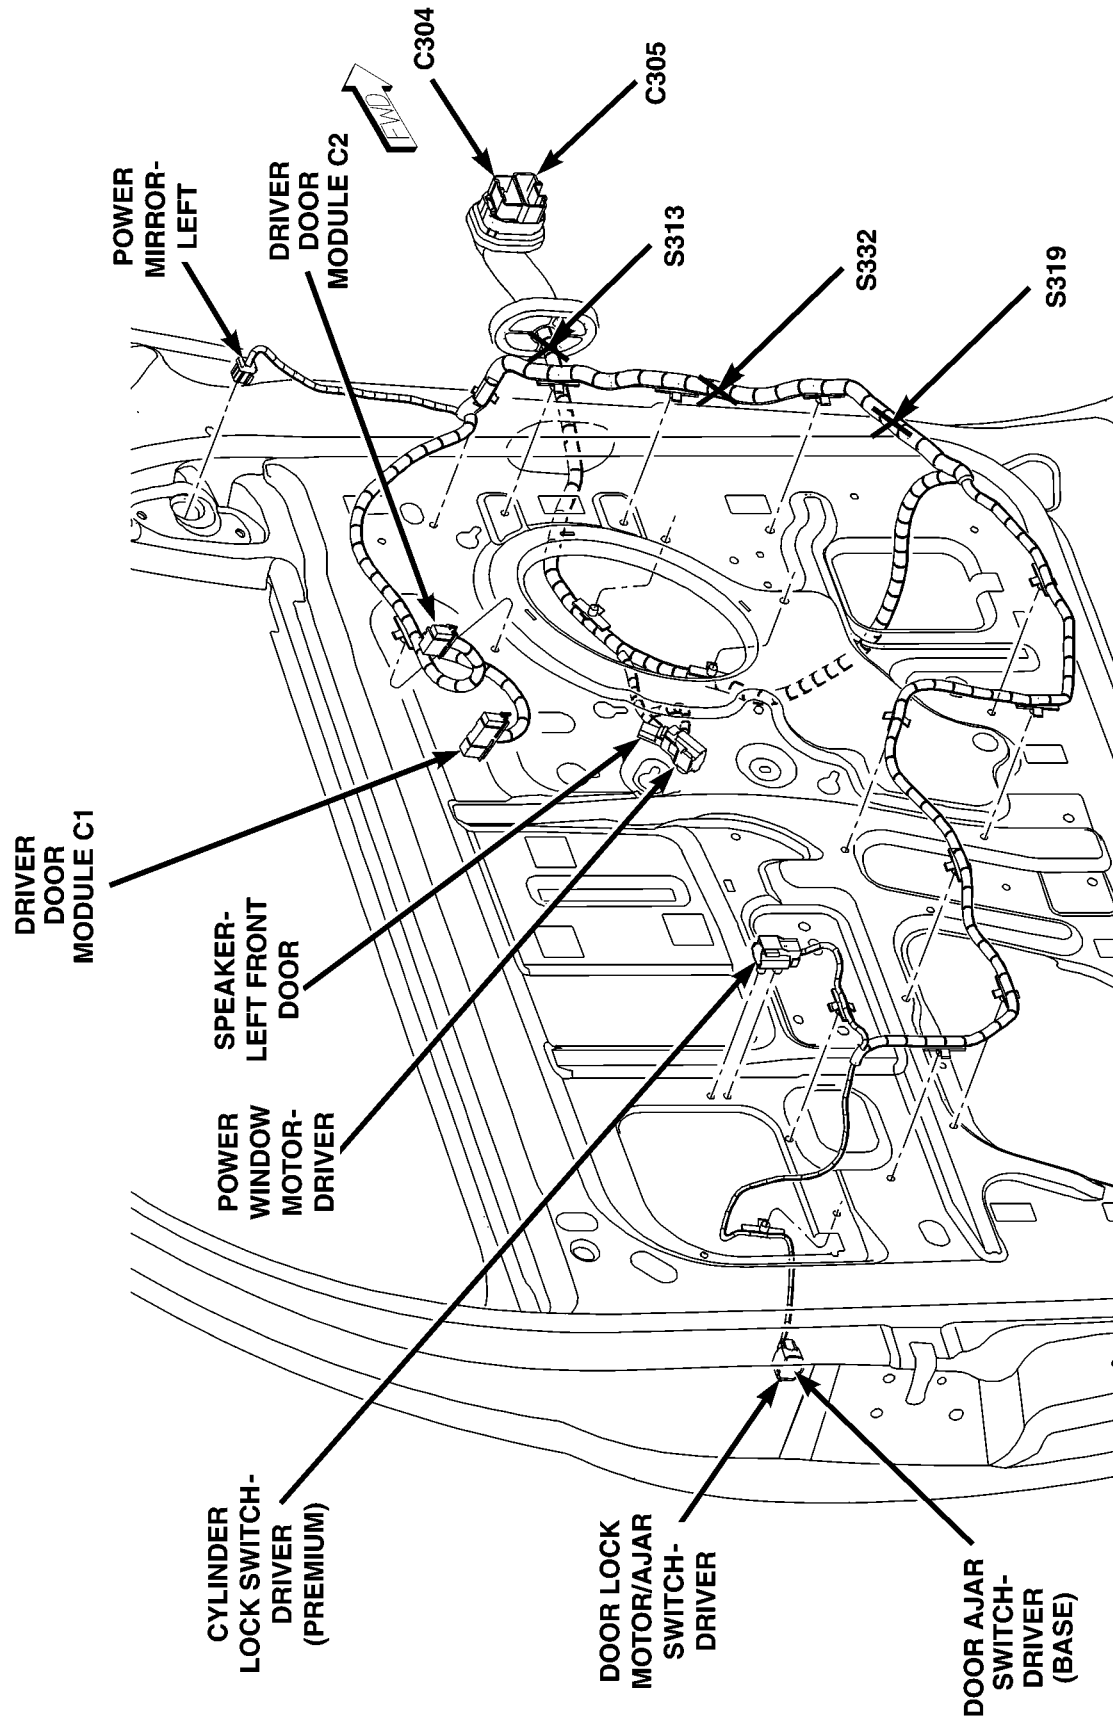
STANDARD CAB LEFT FRONT DOOR PREMIUM
